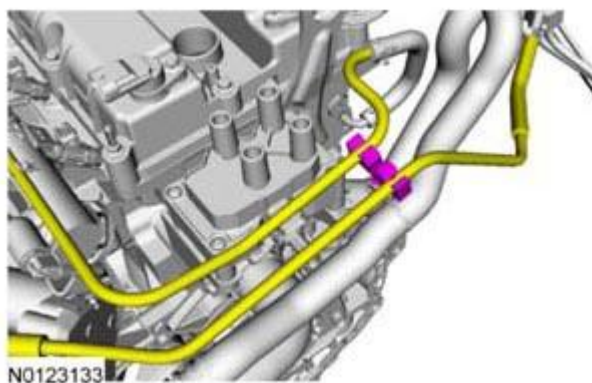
Identifying EVAP Tube And Coolant Tube From Coolant Outlet Bracket Retainer
